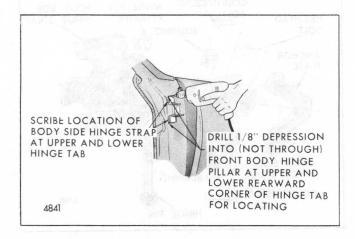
Body Side Door Hinge Strap Removal - "H" Styles
